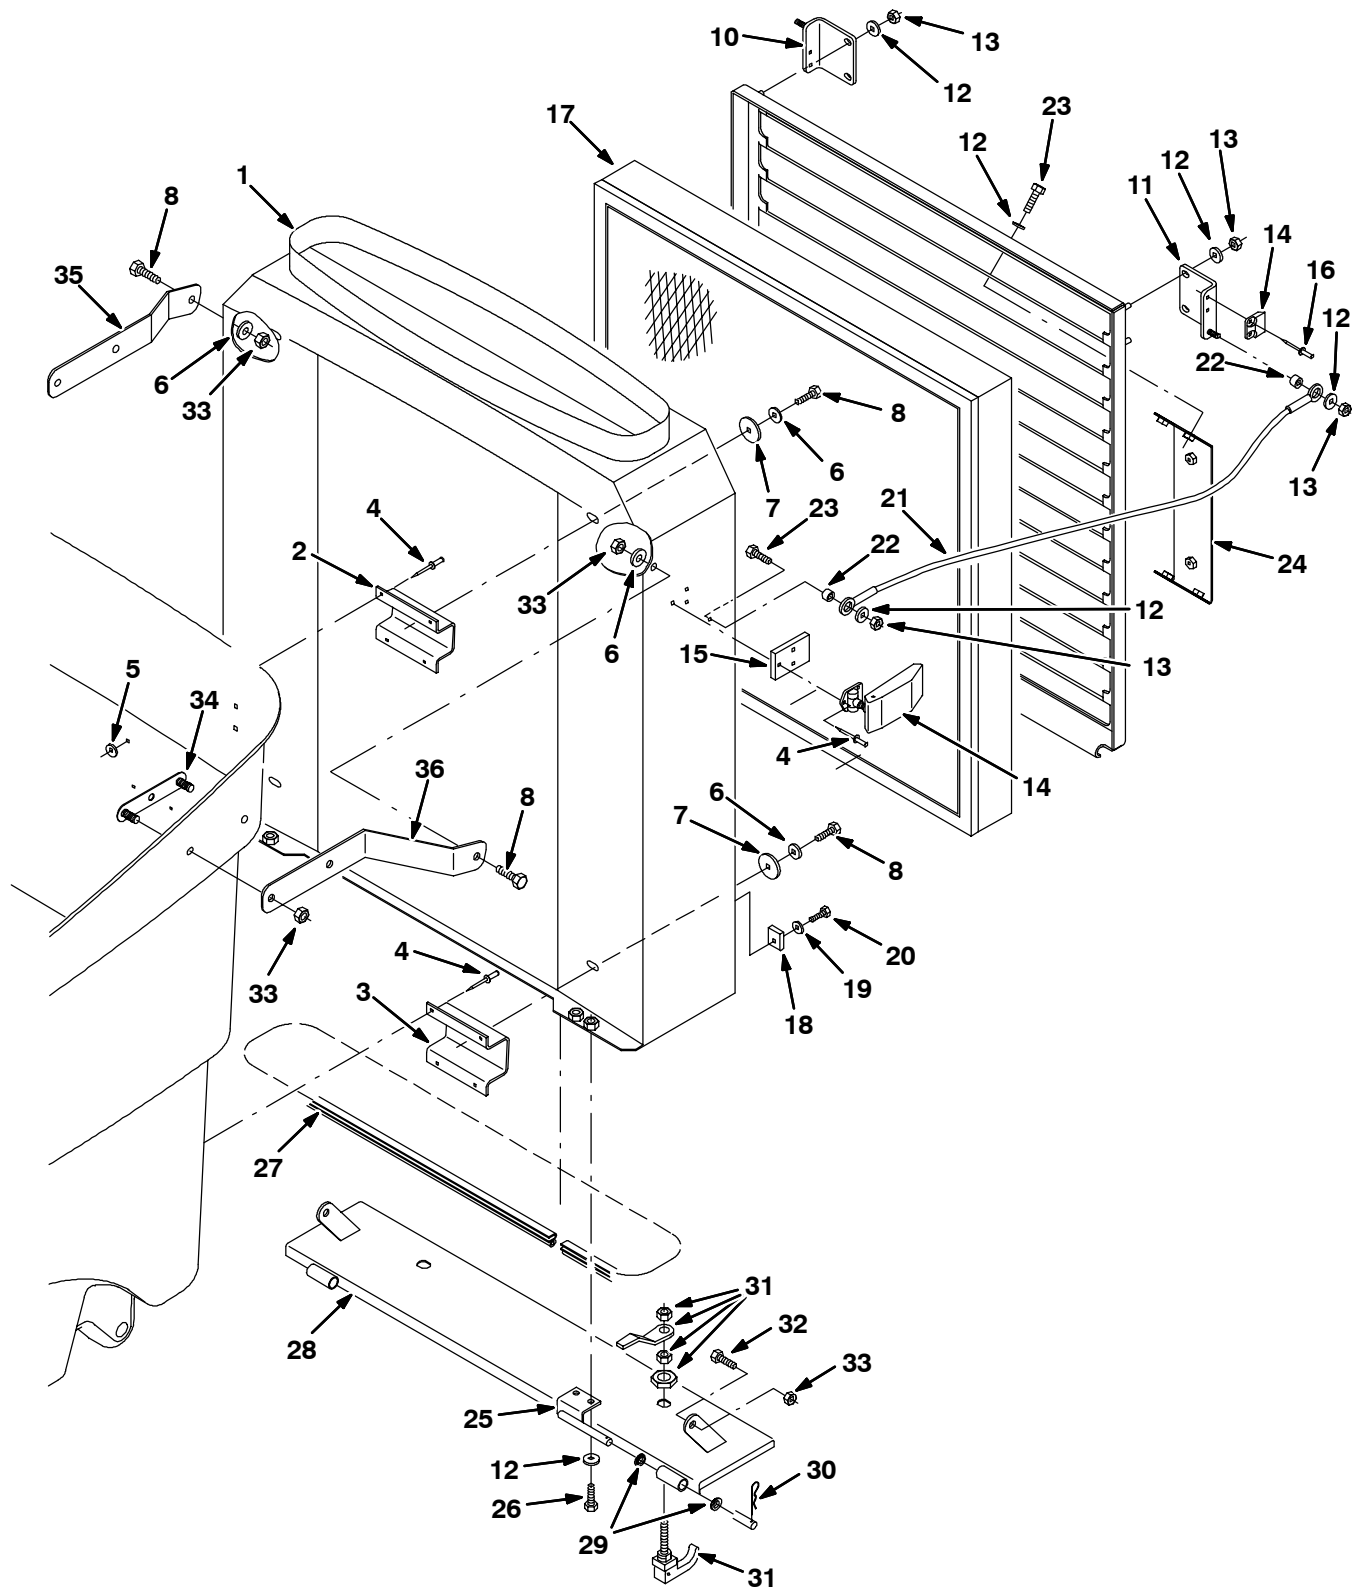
Dust Filter Housing Group (Serial Number 000000-001535)
